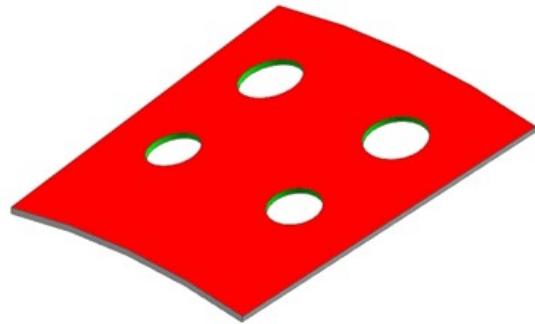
FLAMETUBE SECTION WITH PORTS IDENTIFIED.
